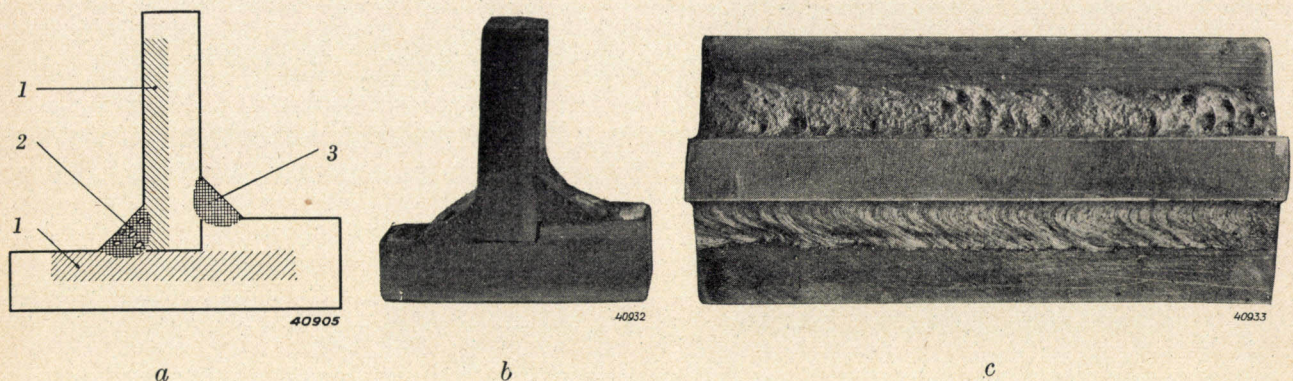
Fillet weld with a sulphur-sensitive rod in which on one side of the strips the upper layer was planed off until the segregation was reached. a) Diagram, 1 segregations, 2 porous weld, 3 sound weld. b) Cross section of the actual weld, c) view of weld from above. The difference in quality between the two welds is clearly visible.
